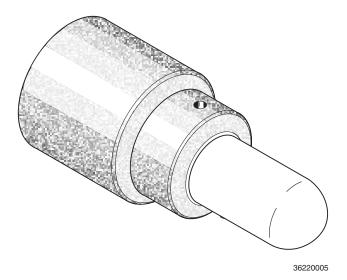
Flame Arrestor Ceramic Diffusion Assembly
